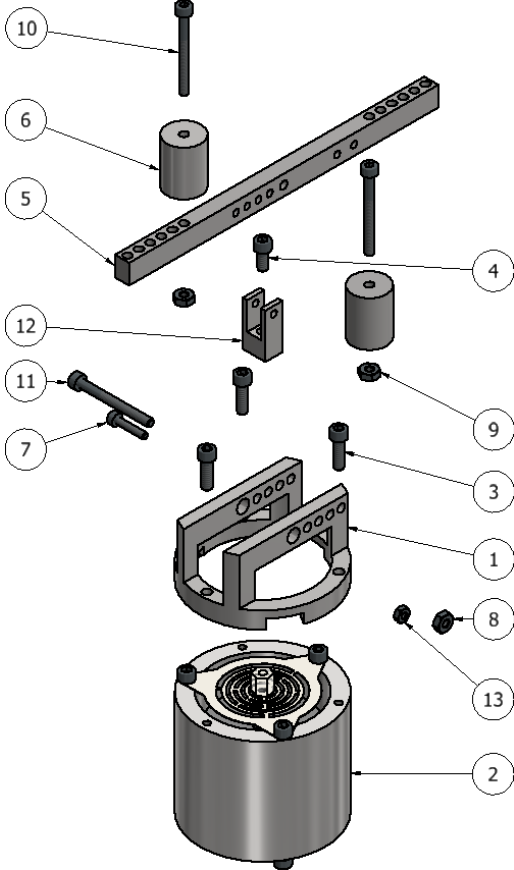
Exploded view of the designed hinged configuration of the flywheel prototype.
